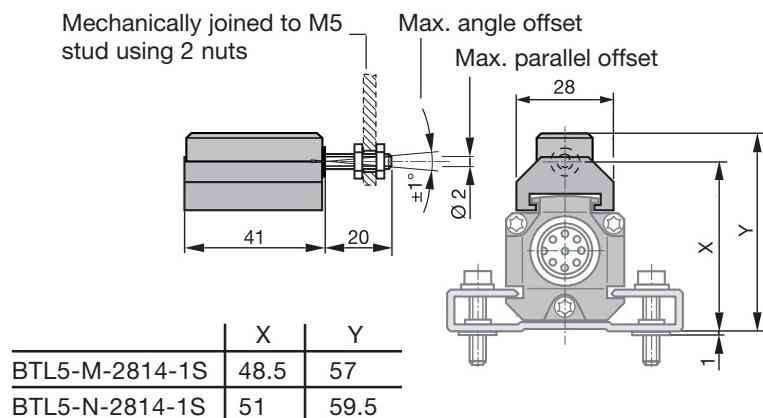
BTL5-M/N-2814-1S magnet ①
